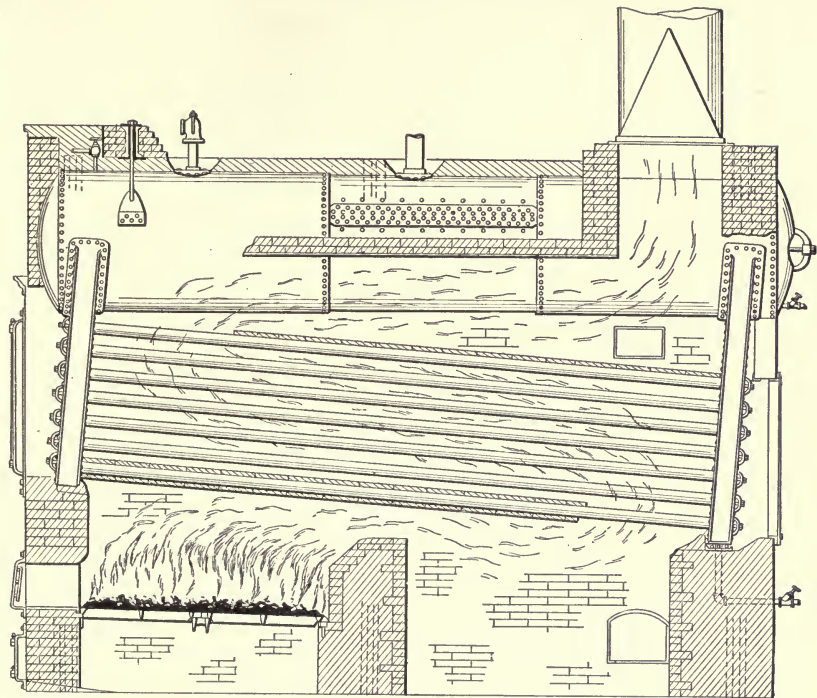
Furnace equipped with tile roof attached to lower row of boiler tubes.
